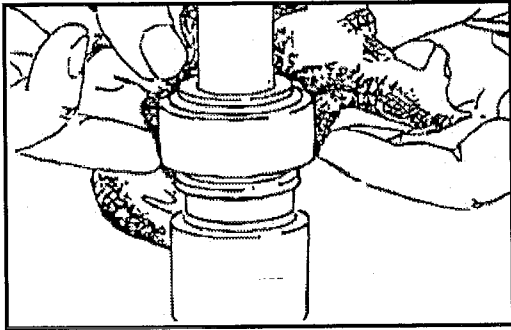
Feed Drive Assembly (ref. 1410373-T1)
